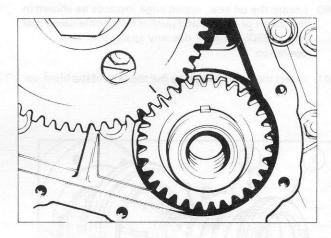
Camshaft and Crankshaft Gear Timing Marks in Alignment
